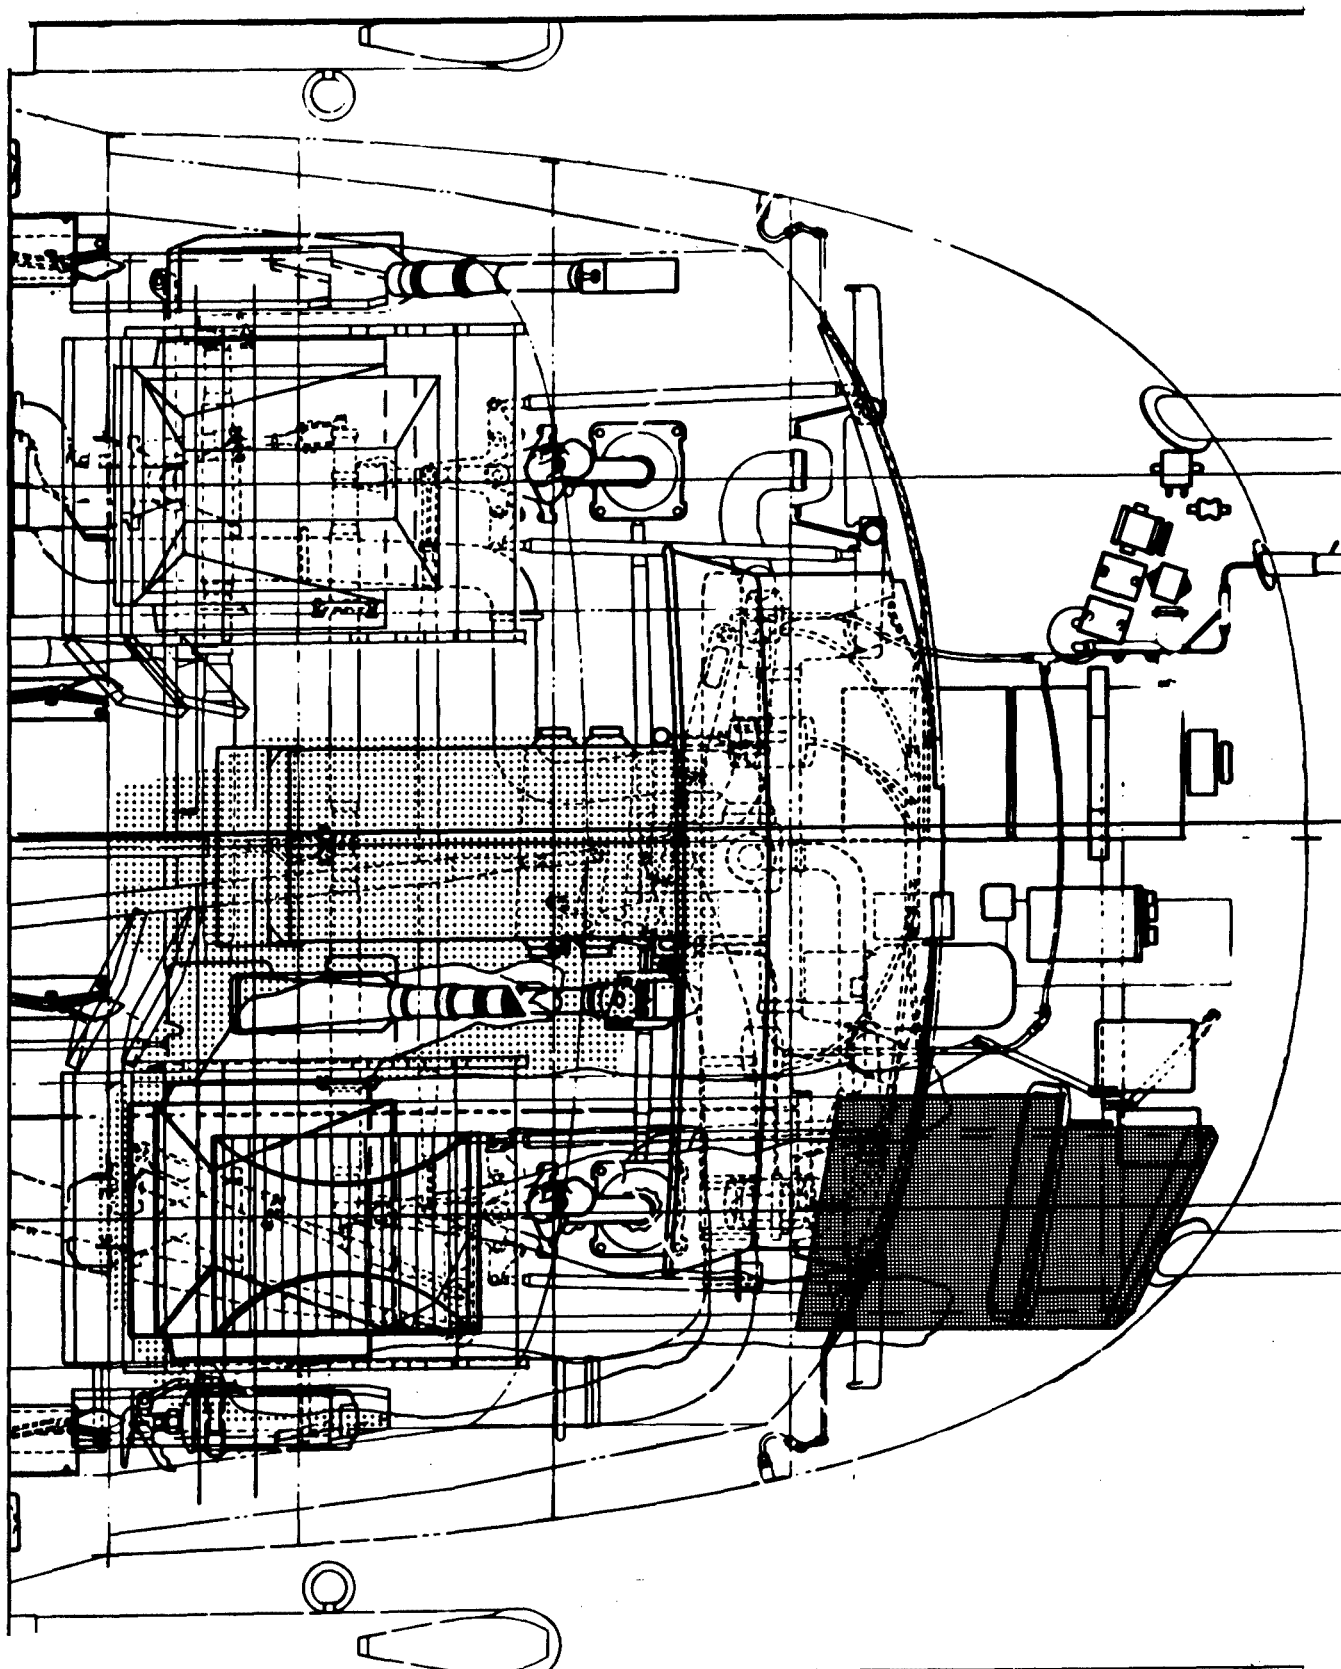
ARMOR CONFIGURATION 1 -- PLAN VIEW 0° AZIMUTH, -45° ELEVATION
